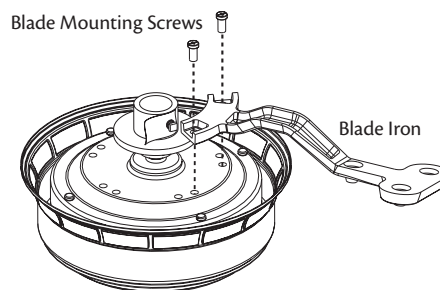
Attaching the blade assembly to the hub of the fan assembly
